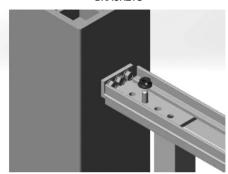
DRILL SIDEWALK BOLT HOLES IN TOP RAIL
